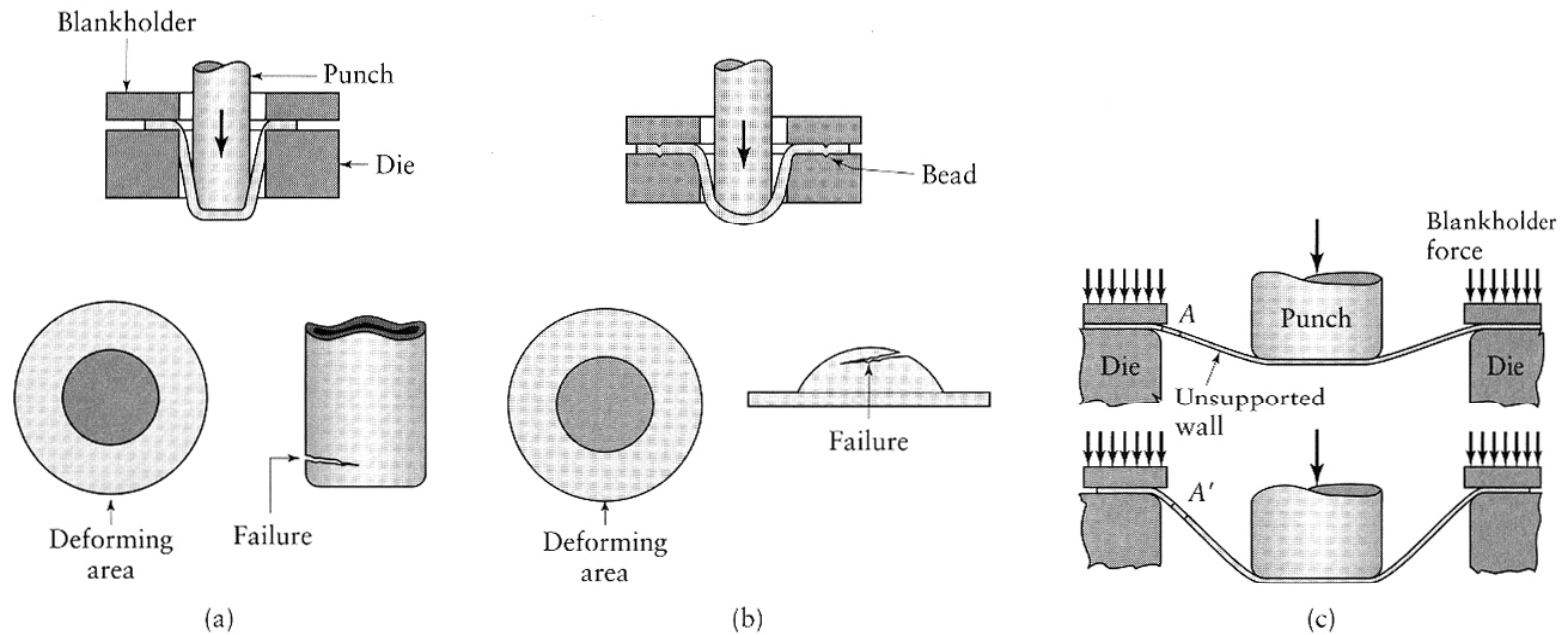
Examples of drawing operations: (a) pure drawing and (b) pure stretching. The bead prevents the sheet metal from flowing freely into the die cavity. (c) Possibility of wrinkling in the unsupported region of a sheet in drawing. *Source:* After W. F. Hosford and R. M. Caddell.
